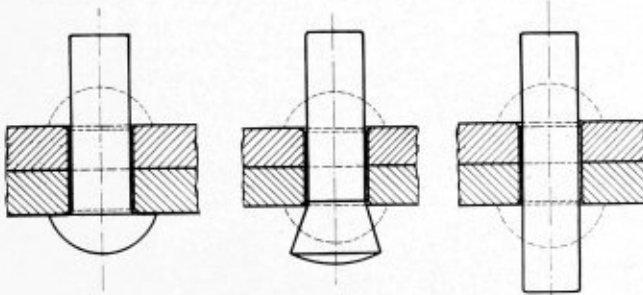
(Left) Ordinary rivet with head. Fig. 9.—(Center) Schuch method of riveting. Fig. 10.—(Right) Pin rivet
